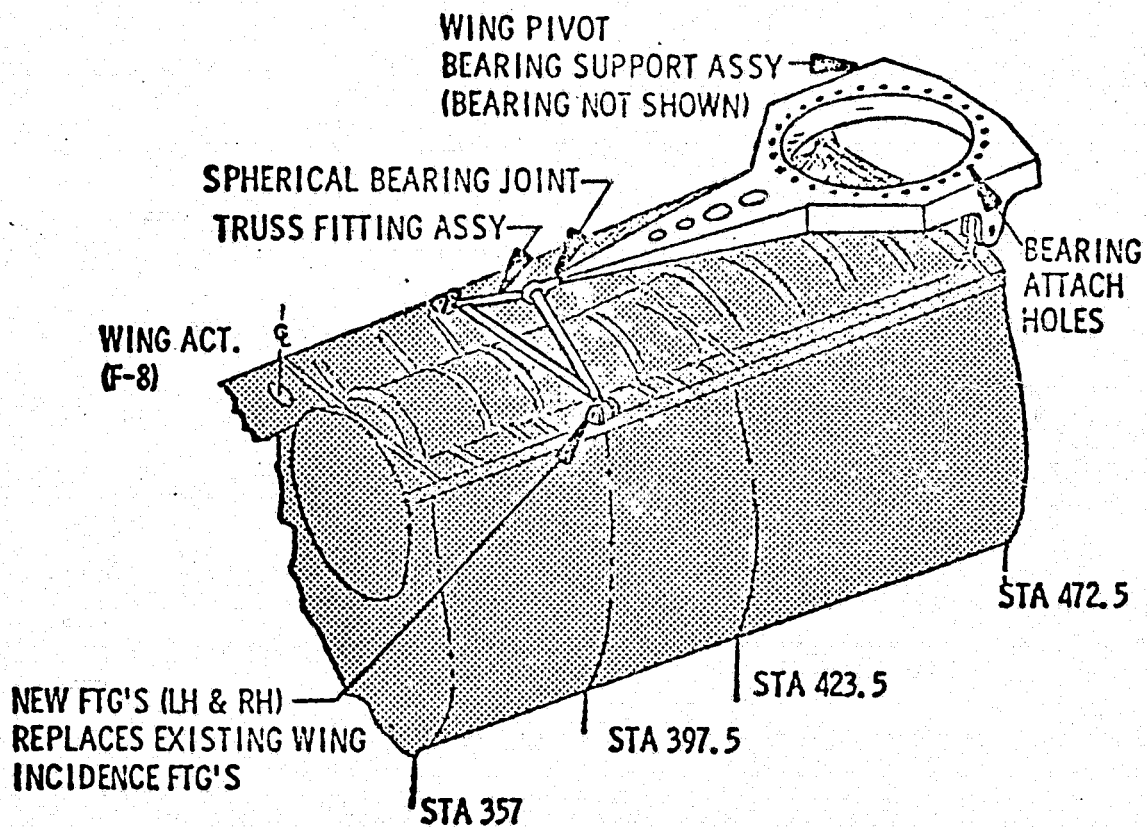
WING SUPPORT STRUCTURE
